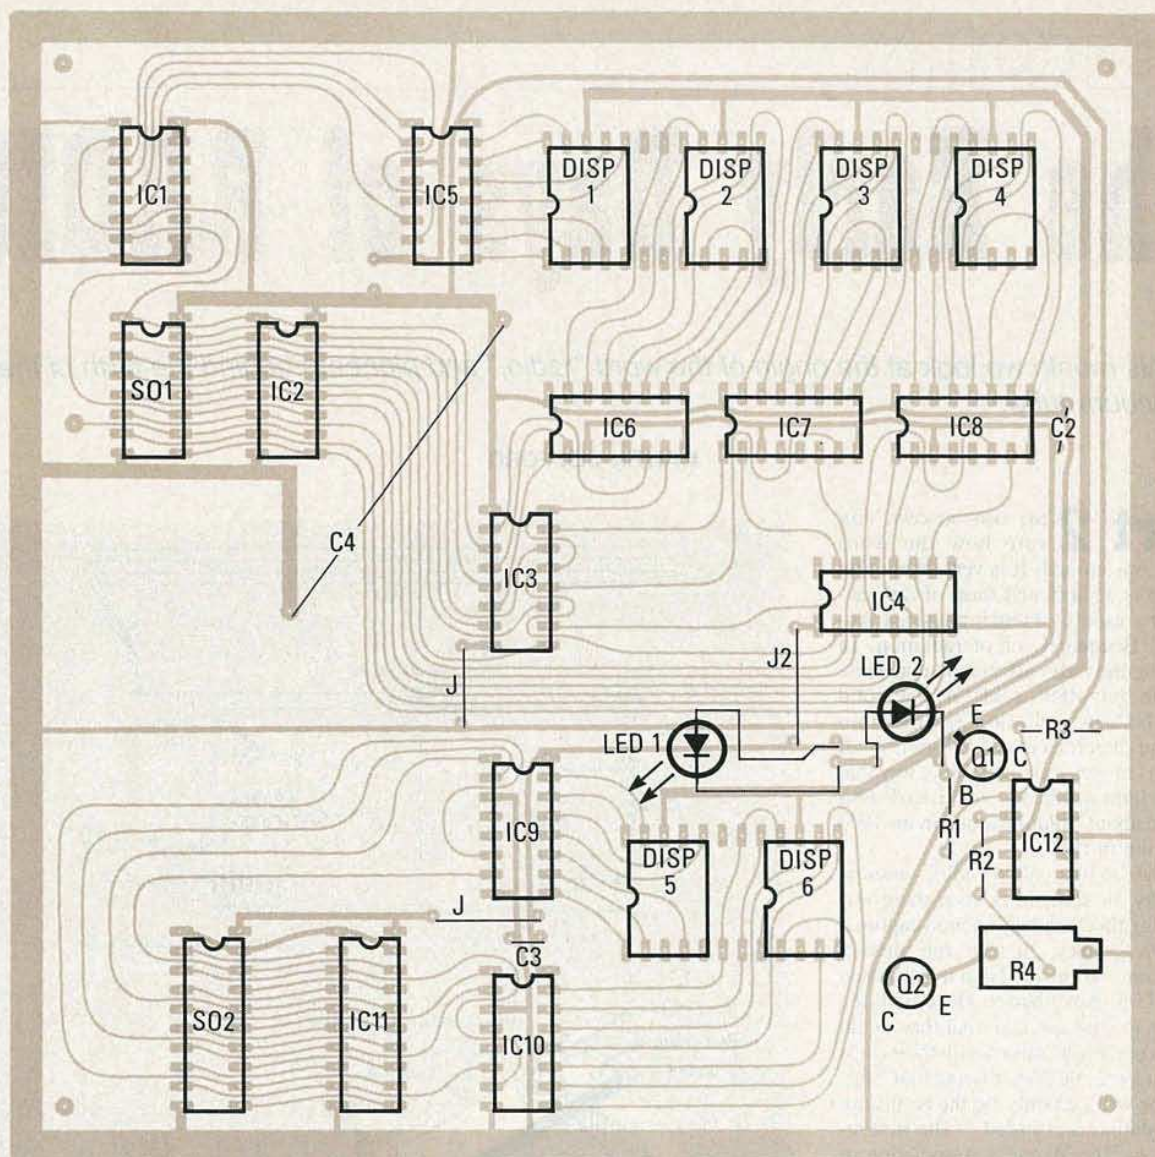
PHOTOTRANSISTOR Q2 AND LED2 must be mounted so that their receptive and transmissive surfaces receive no ambient light. Heatshrink or tape them together. The foil pattern for this board is shown in PC service.
